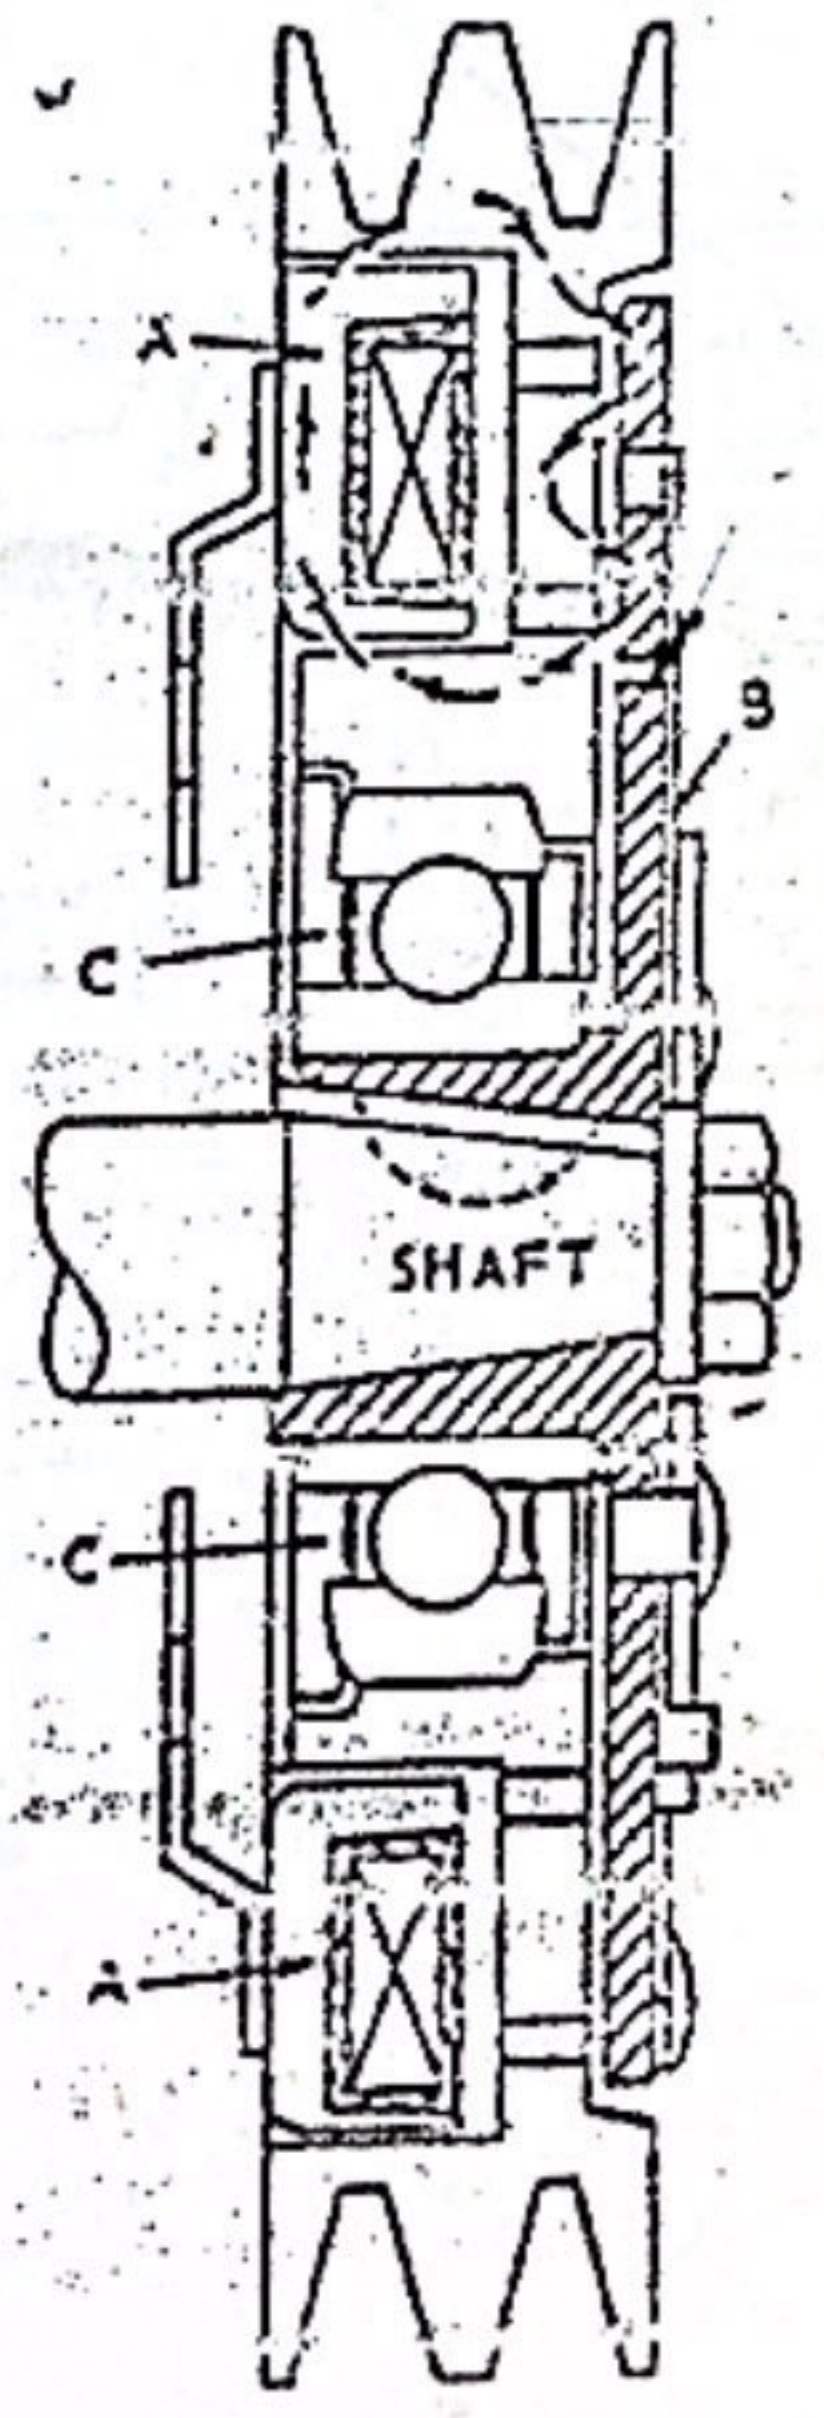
Compressor pulley with stationary electromagnet, showing magnetic field. A-Electromagnetic coil. B-Clutch disk. C-Bearings.
